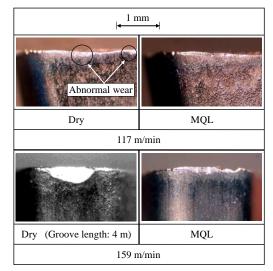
Conditions of flank wear [(Al, Ti) N-coated tool, cutting a groove of 40 m]
